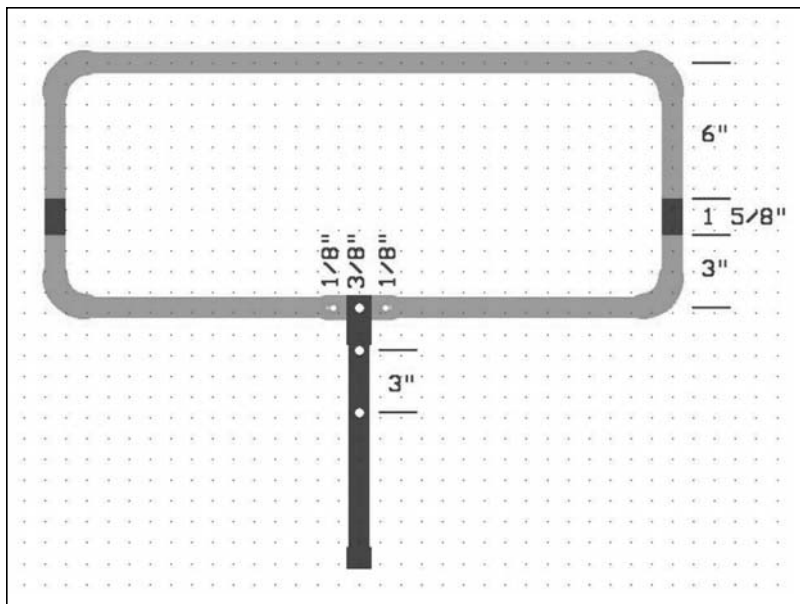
Dimensions of the Mount Vernon Moxon (lighter part is aluminum foil tape).
